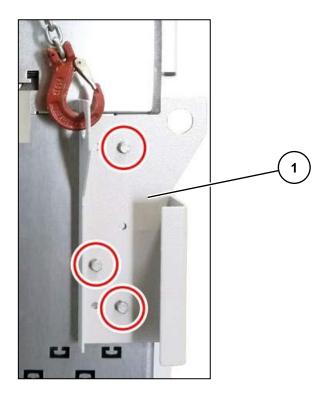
Craning angle (1) mounted at the side of the panel front (3 bolted joints), shown here with crane hooks
